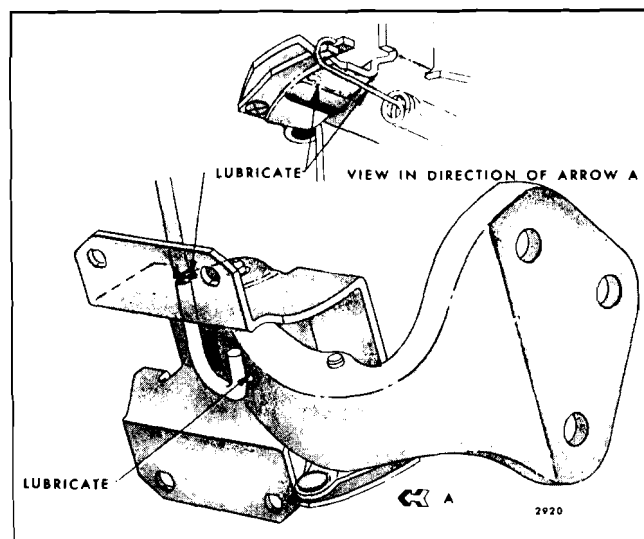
"E" Body Front Door Hinge Lubrication
